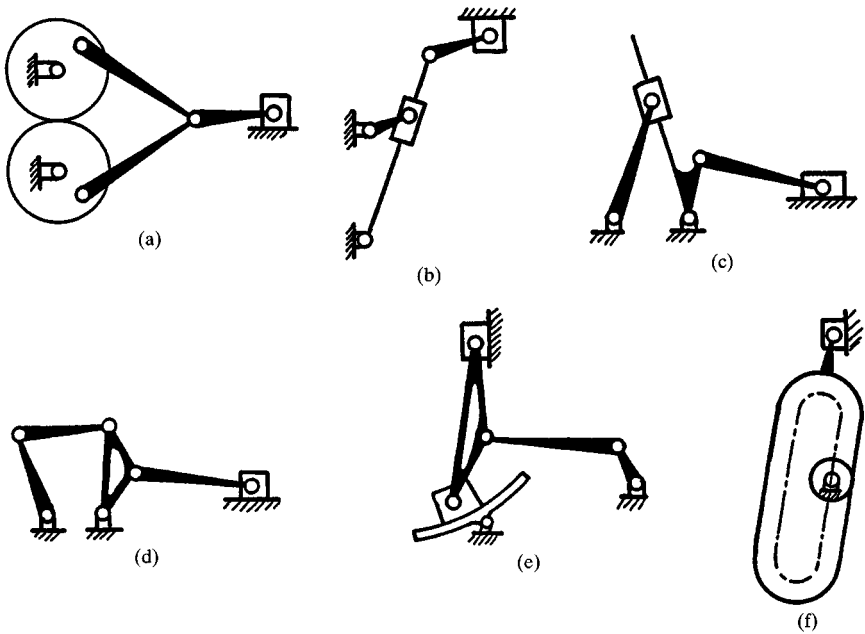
Reciprocating mechanisms II. (a) Geared cranks; (b) shaper mechanism; (c) slider on Whitworth quick-return mechanisms; (d) slider on drag-link mechanism; (e) variable-stroke engine; (f) gear-driven slider.
